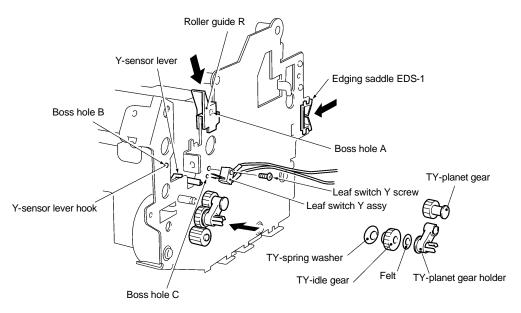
Reassembling the Right Side of the Chassis (2)
